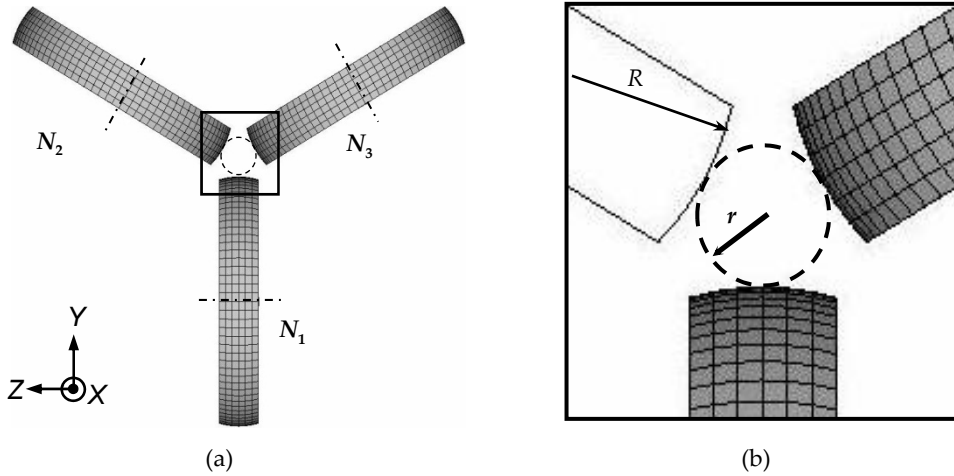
Convex type roller. a) roller shape. b) Close-up view.
